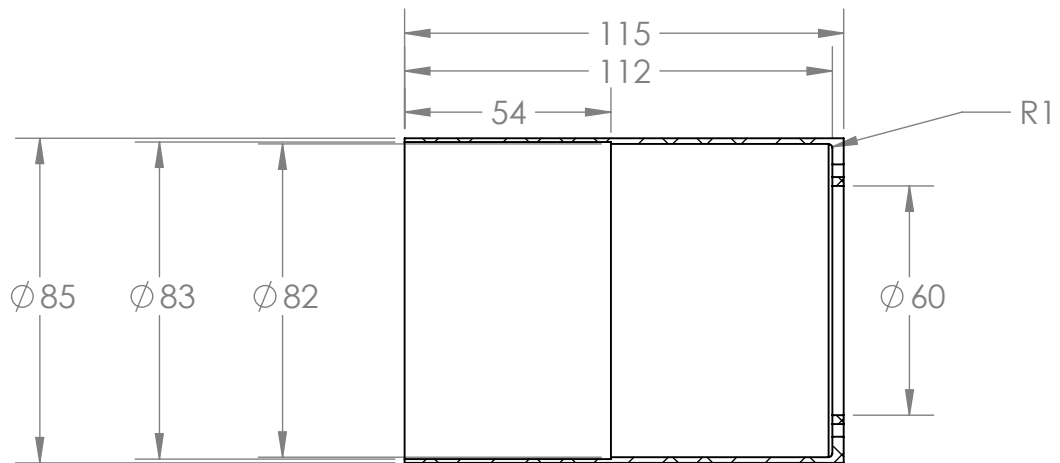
Cross-section drawing that was used to machine the solar shade. Units are in mm.
